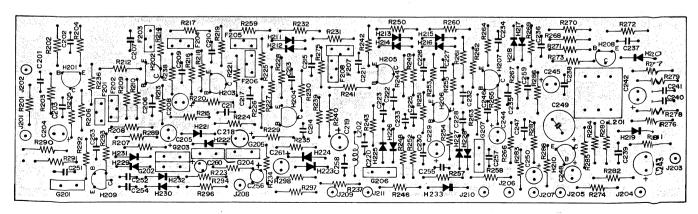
FM IF Amplifier Assembly P200 Component Locations
